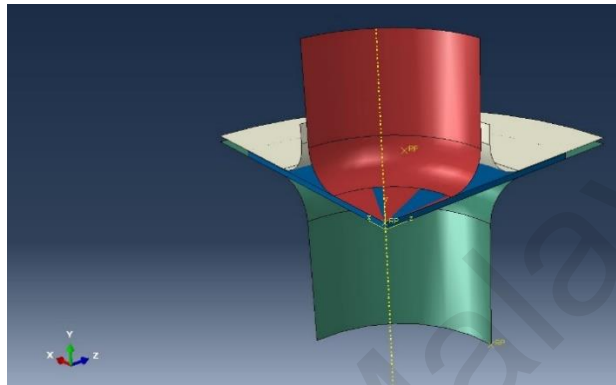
3D model of circular sheet metal drawing tools setup
